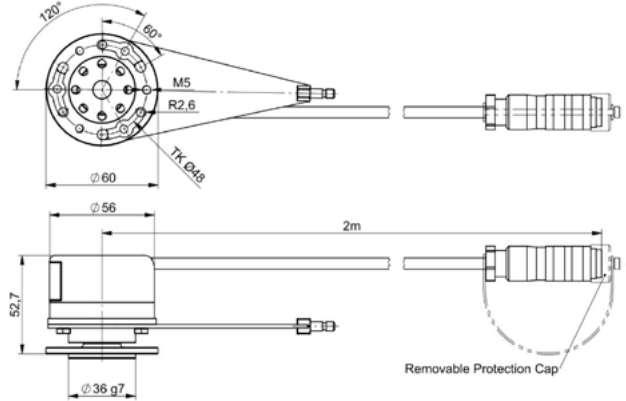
Dimensions of crank angle encoder Type 2614C11
